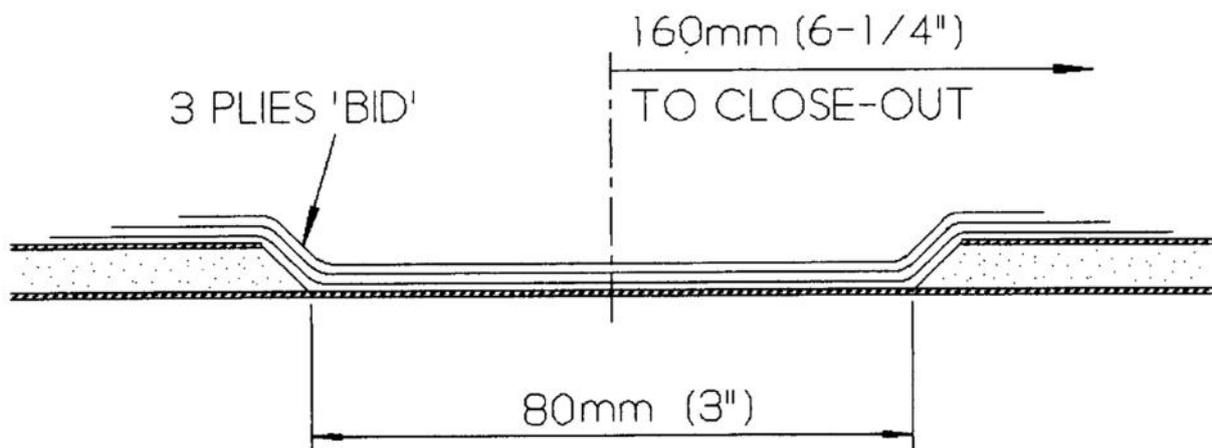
Reinforcement of bottom skin at tailwheel spring front attachment bolt position
